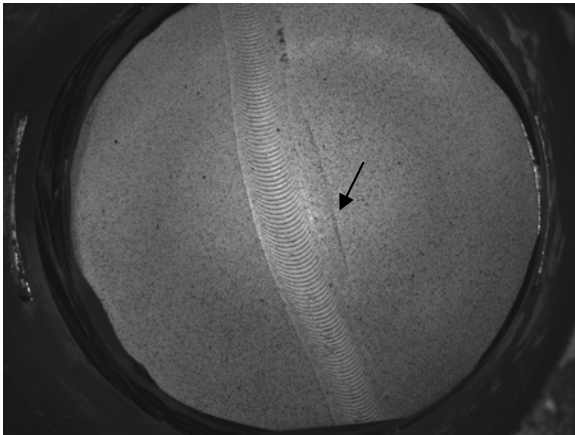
Photo representative of failure observed in the thin sheet of full-dome LDH tests of the 5182 TWB welded alloy.
